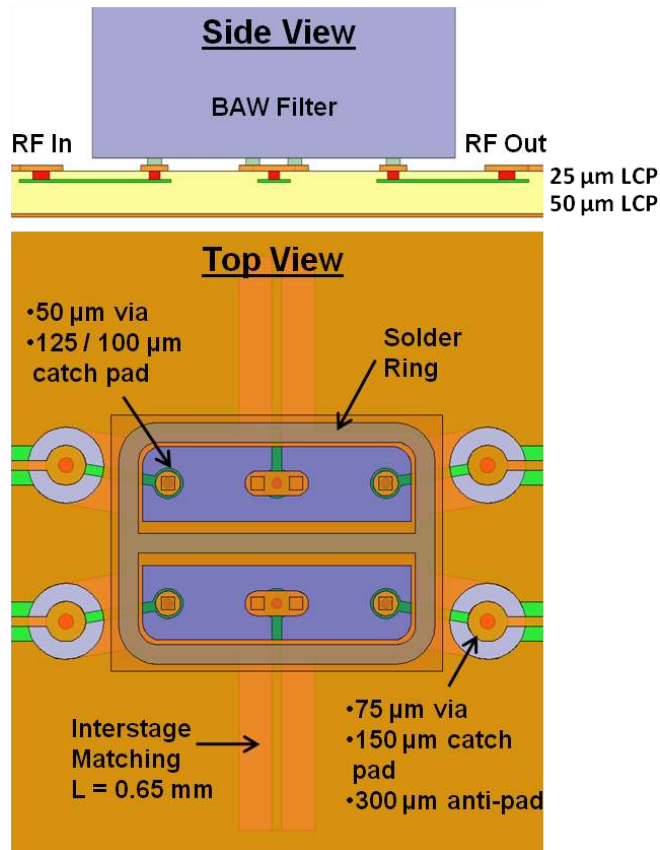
Layout of via interconnects for dual-channel filter package.
